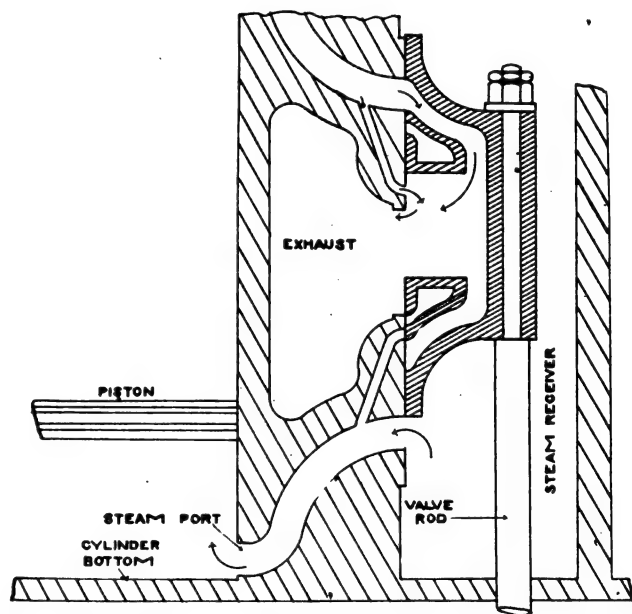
Another View of the Slide Valve shown in Fig. 1. Entry Port on One Side of the Piston Shown Open.
